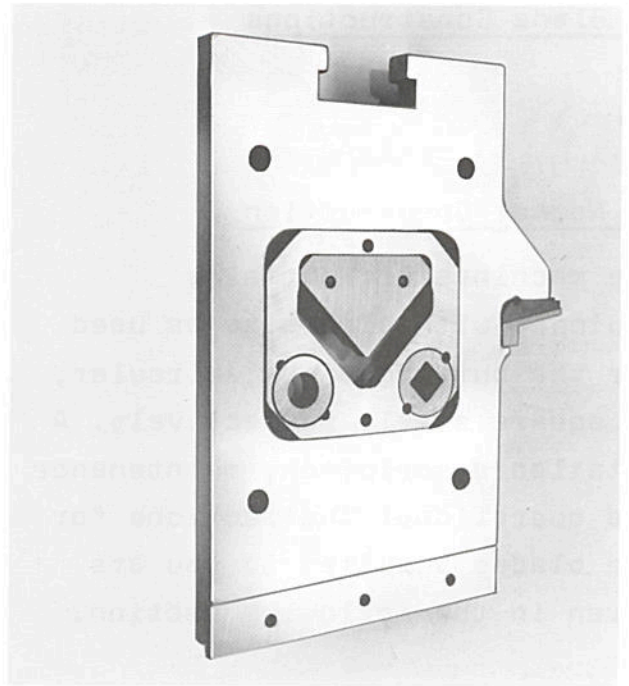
Fixed mounting of the movable sectional blade in the sectional slide
